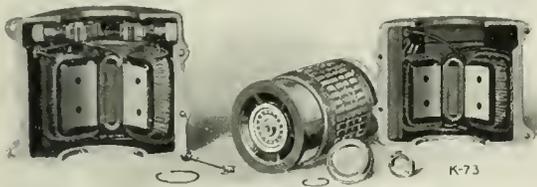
Mining Locomotive Motor, Disassembled, showing the Ball Bearings
